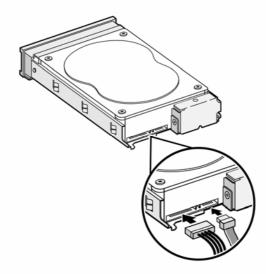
Installing a non-hot-plug SATA hard drive in the HDD carrier and chassis
